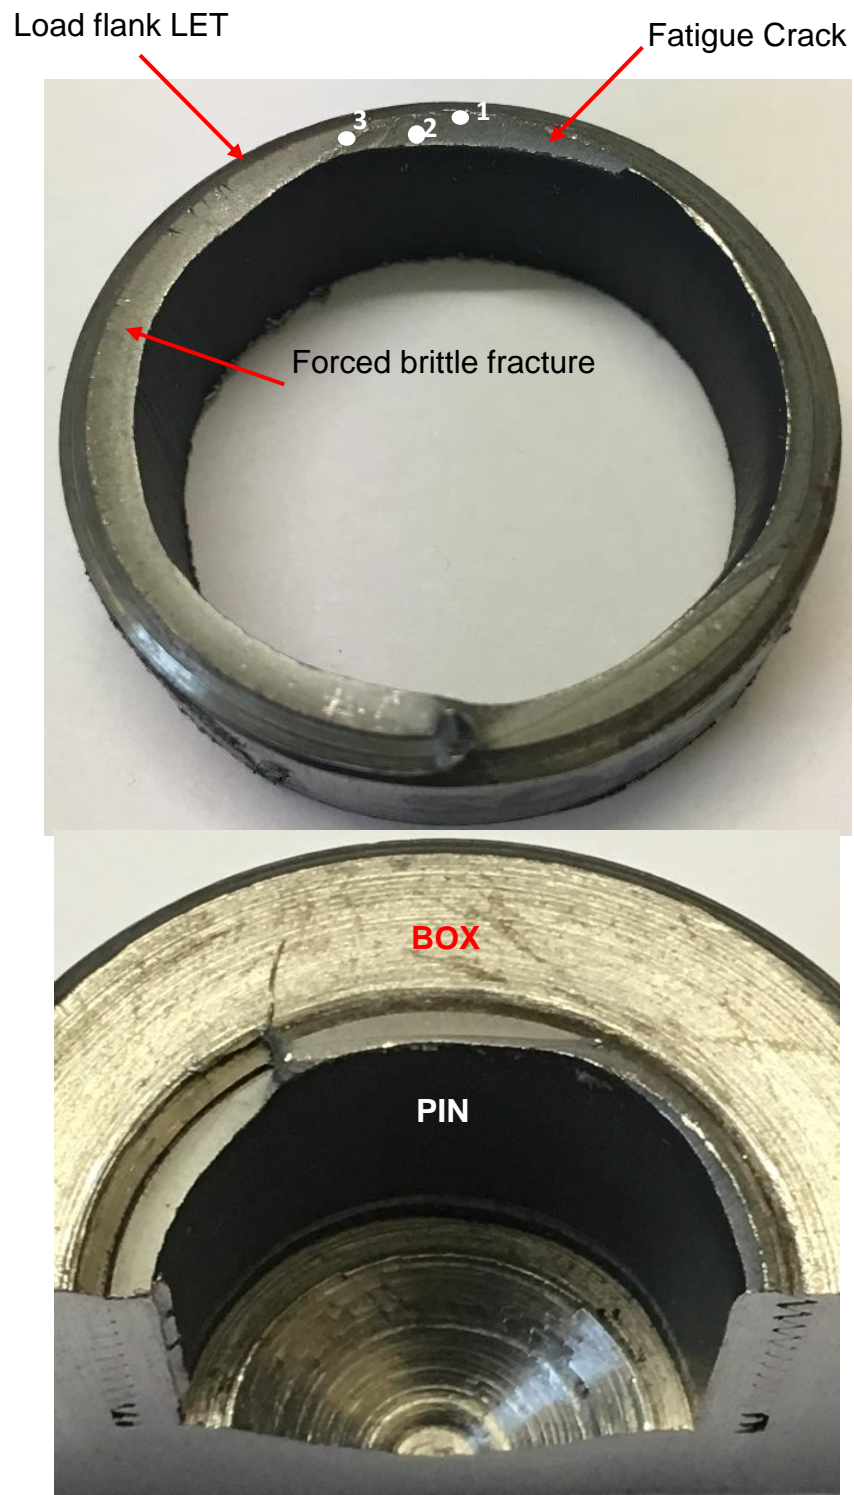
fracture surface of a 1" API Line Pipe specimen.
